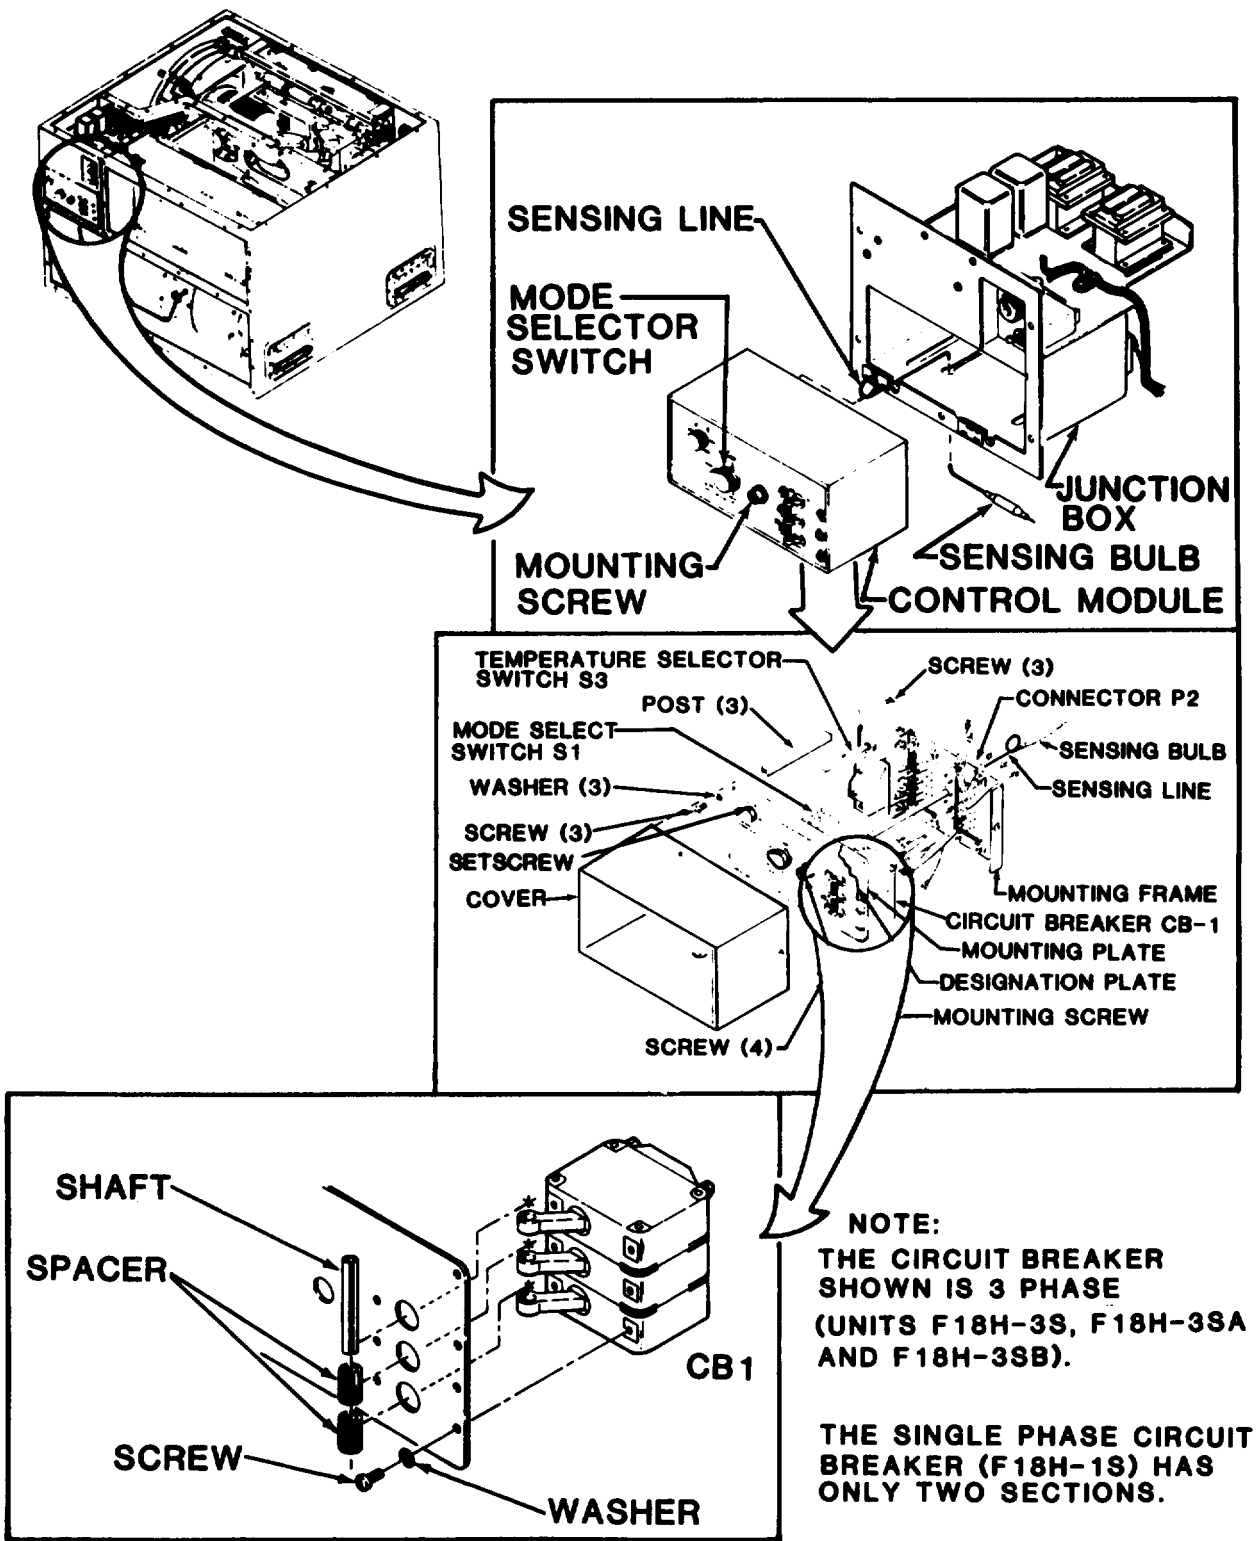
COMPR CIRCUIT BKR (Compressor Circuit Breaker) CB1
